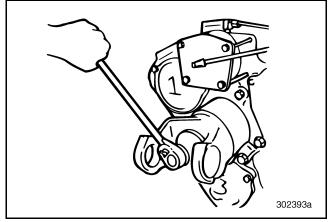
Removing Drive Yoke Nut (T313L21/T318L21 Shown)
